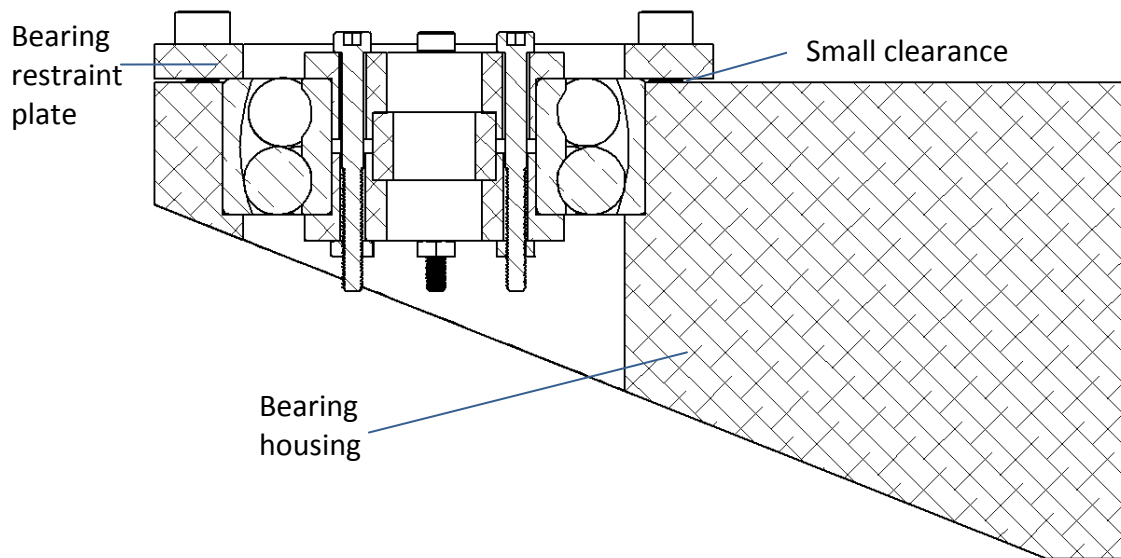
Bearing restraint plate secures bearing assembly into bearing housing
